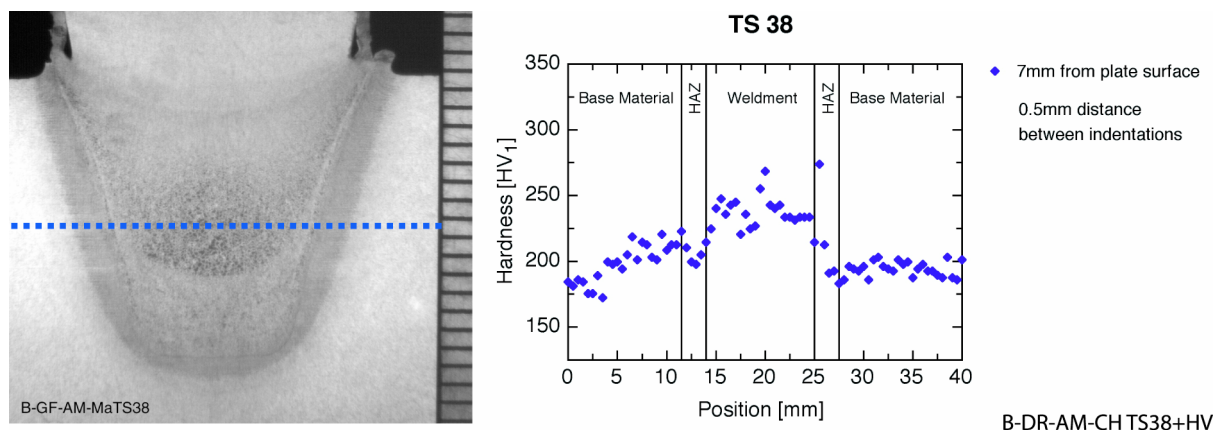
Macrograph and hardness profile of mild steel weld TS 38.
